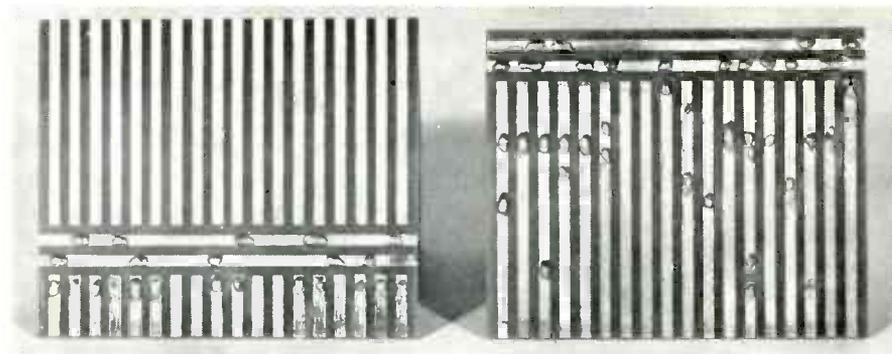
Printed wiring side of amplifier showing arrangements of breaks and solder points
